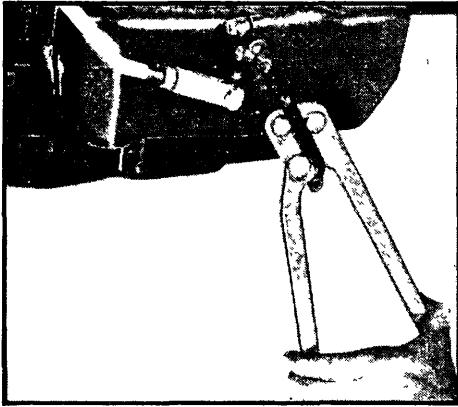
Throttle lever bending tool. 1950-52 Hydra-Matic
